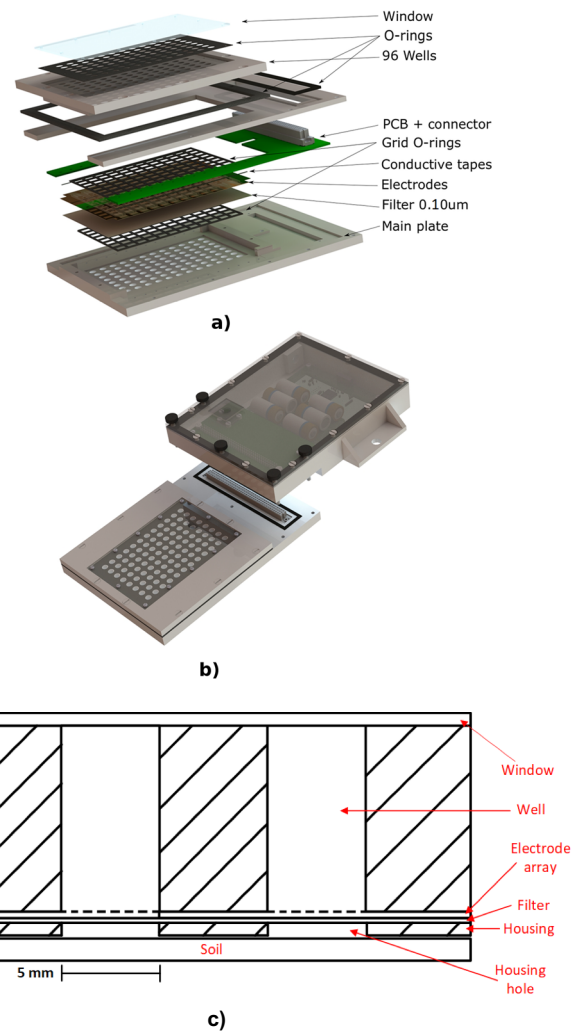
a) Exploded view of the EcoChip multi-layer structure showing the wells, the electrodes and the filter, b) view of the complete EcoChip including the layered module and the electronic board, and c) a cross-section view of one culture well.
